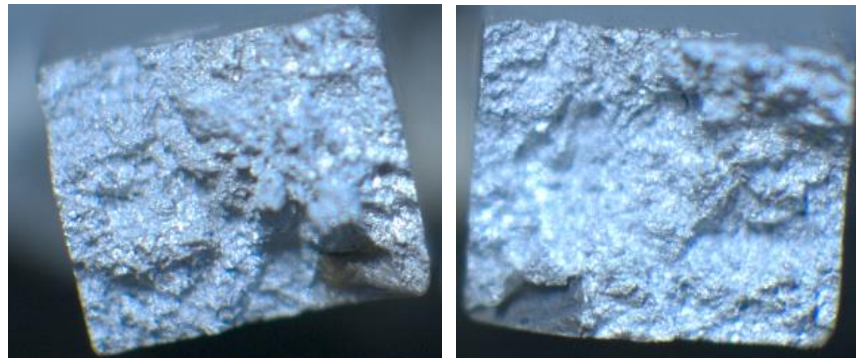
Double oxide film defects on the fracture surface of an AZ91 tensile test bar produced under a cover gas of 0.5%SF₆/air. The dimension of the fracture surface is 5 mm × 6 mm.
